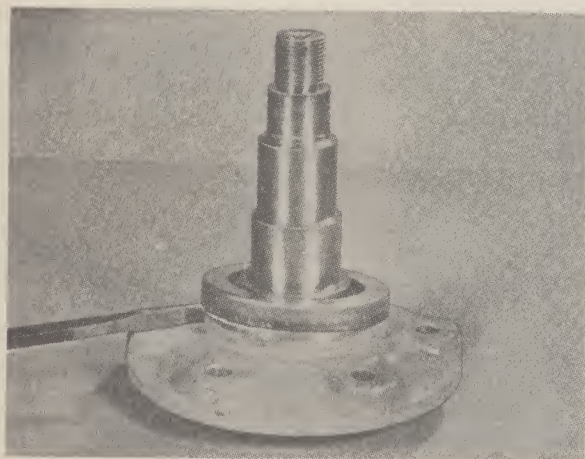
B—Right view shows live front wheel spindle being removed from carrier. Spindle wearing cup shown at left must be square with grease seal and free of nicks or scoring
